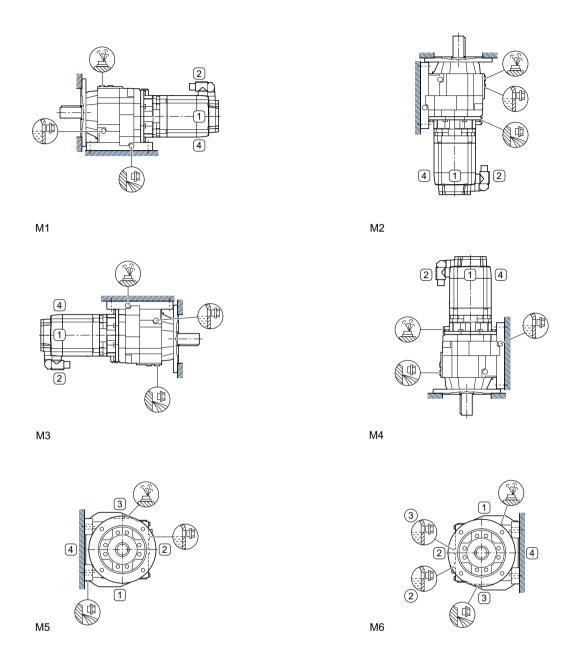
Mounting positions for servo helical geared motors ZB and DB, foot-mounted and flange-mounted designs, frame sizes 39 - 89, 2 stage and 3 stage
